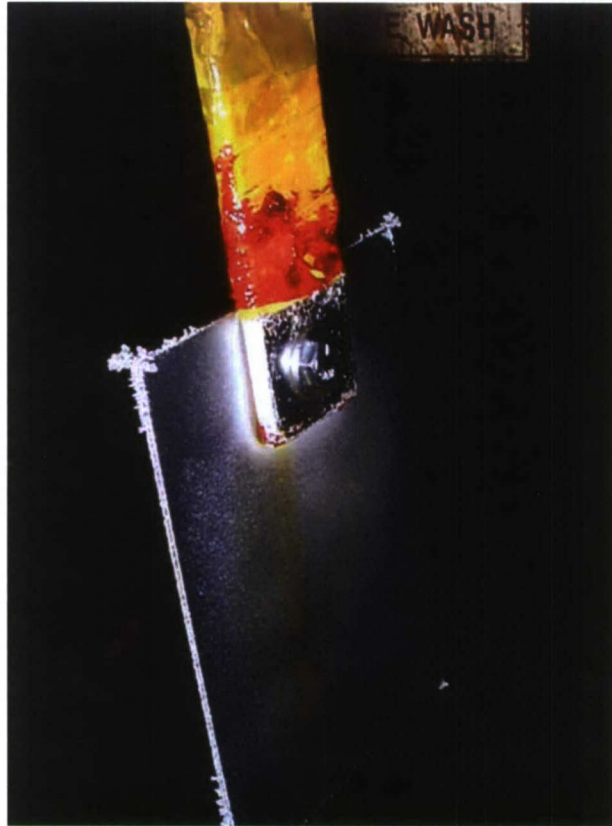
Plated coupon at end of 4-in. PRD plating cycle.
